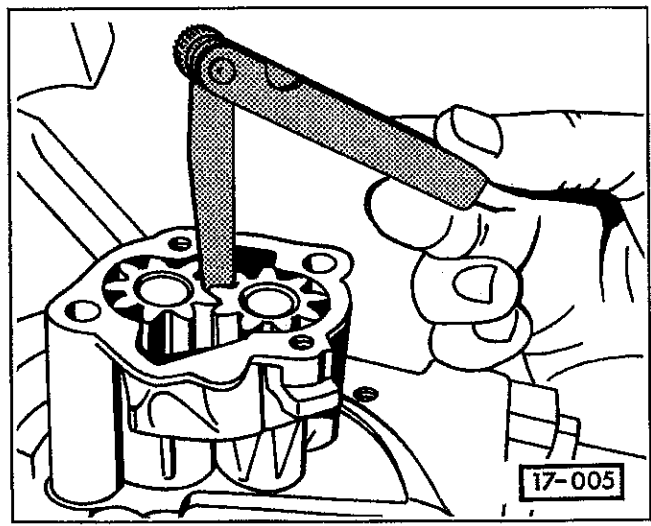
Oil pump gear backlash being measured using feeler gauge. Maximum allowable wear limit: 0.20 mm (0.0079 in.)
